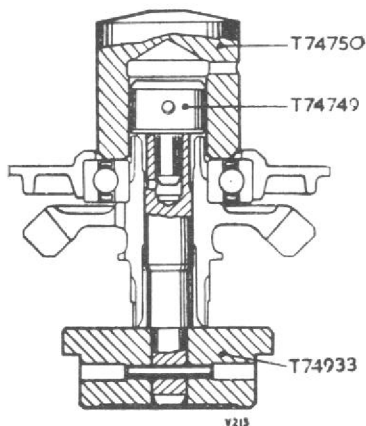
Pressing the bearing and housing on to the lower vertical drive
